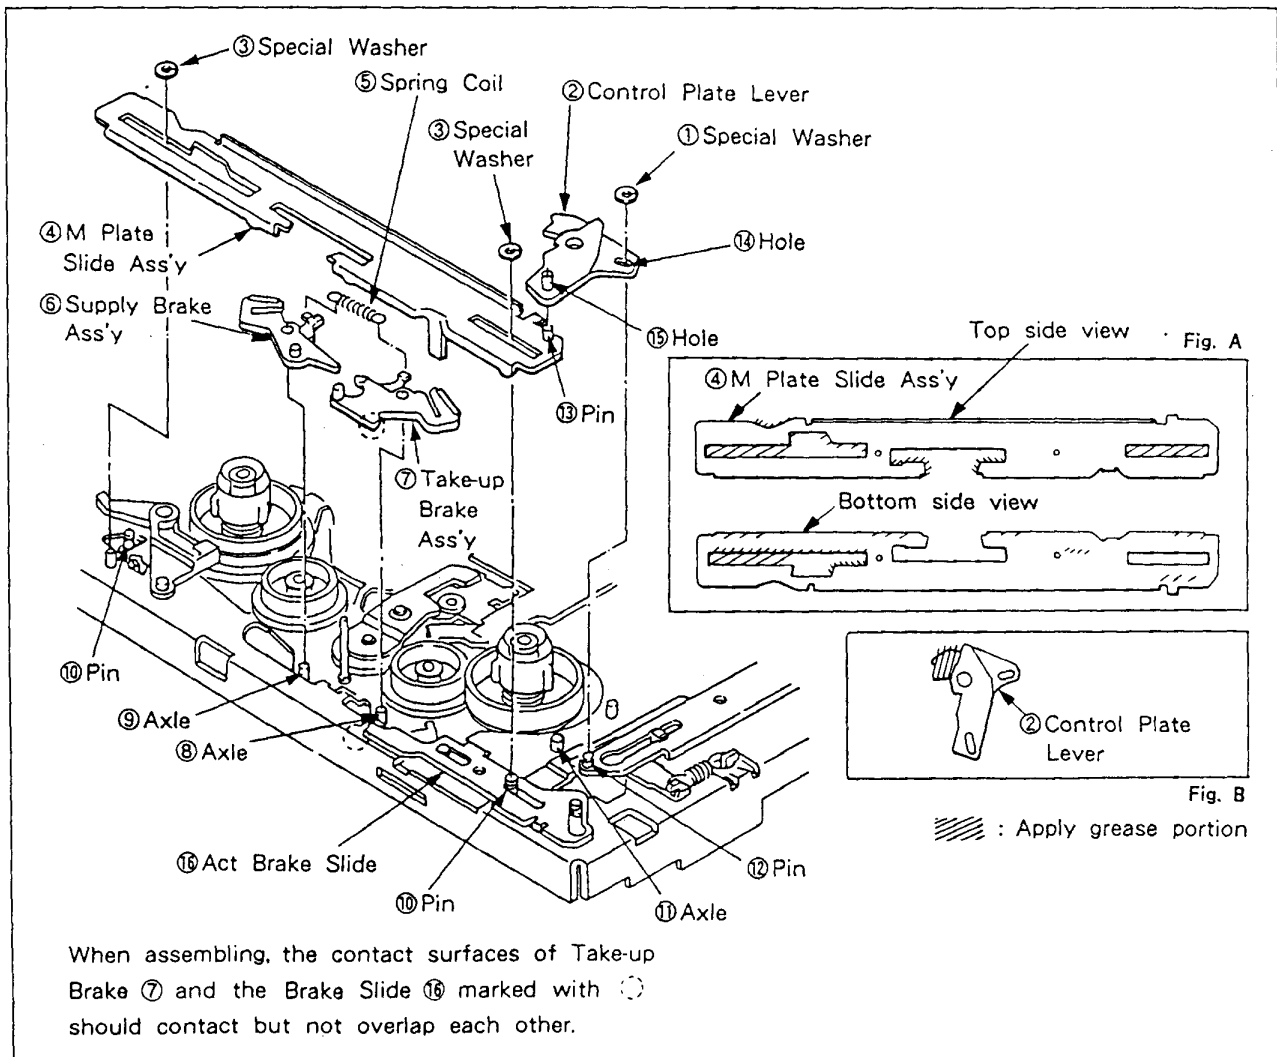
Supply Brake Ass'y & Take-up Brake Ass'y
